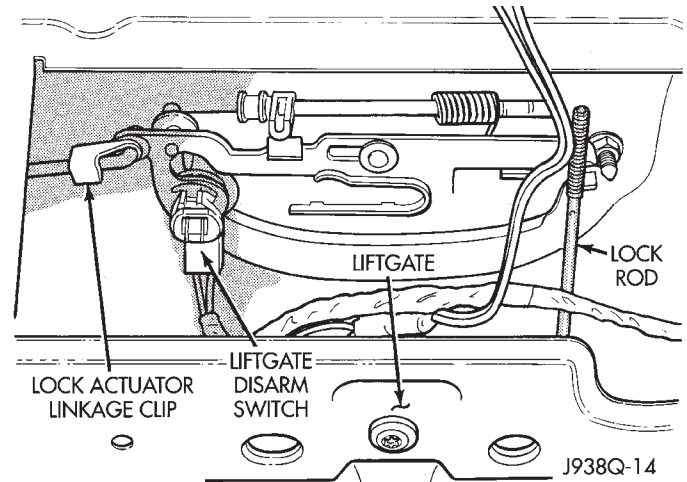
Lock Actuator Motor Linkage Remove/Install
